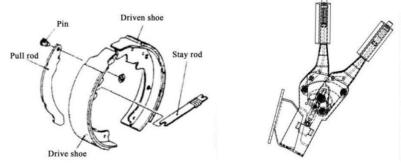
Parking Brake Device Fig. 2-2.2 Parking Brake Handle
